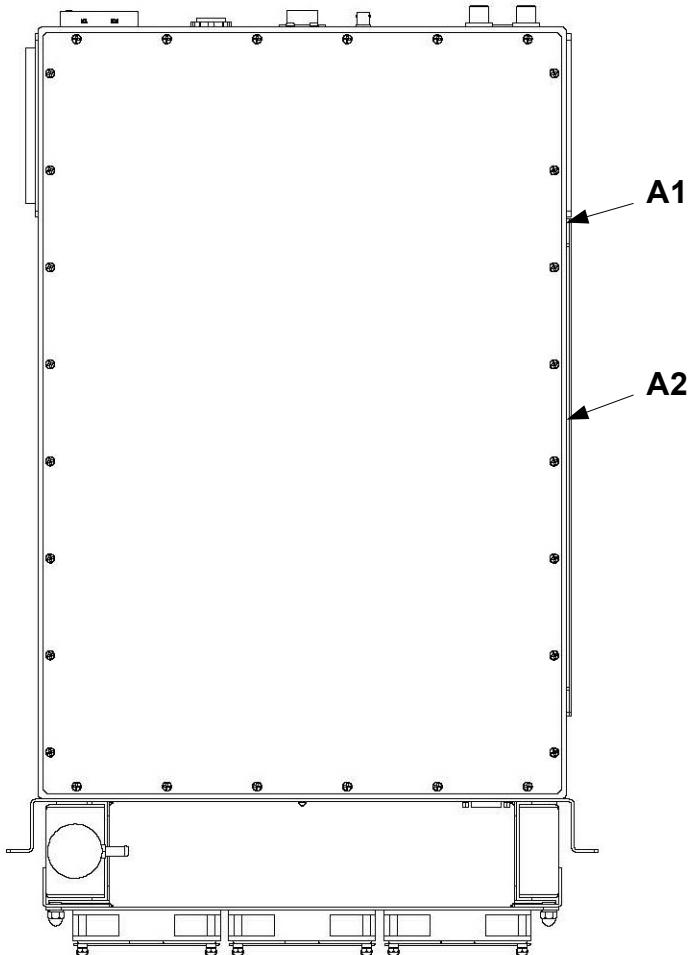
1200A225 MPA/Module Locations (Rear View)
